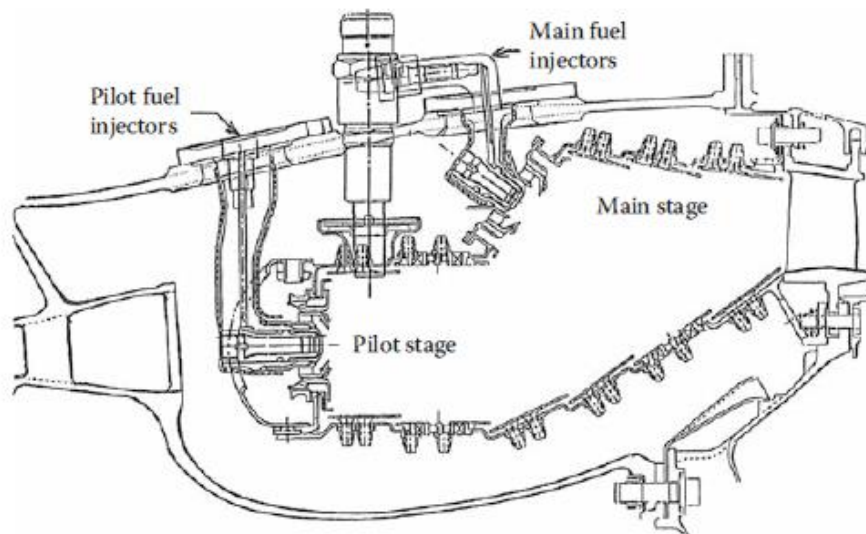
Axial staged combustor for P & W V2500-AS engine [5]
